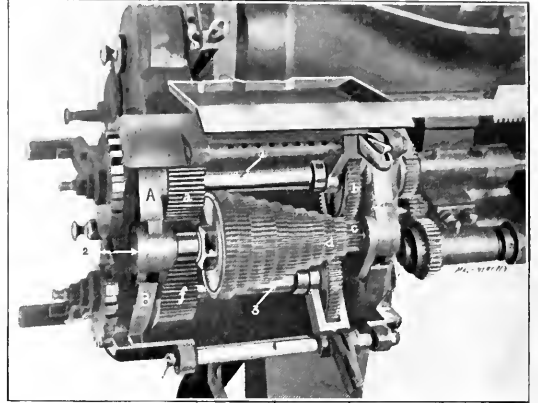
Gear Case Cover Removed showing Arrangement of Gears.
